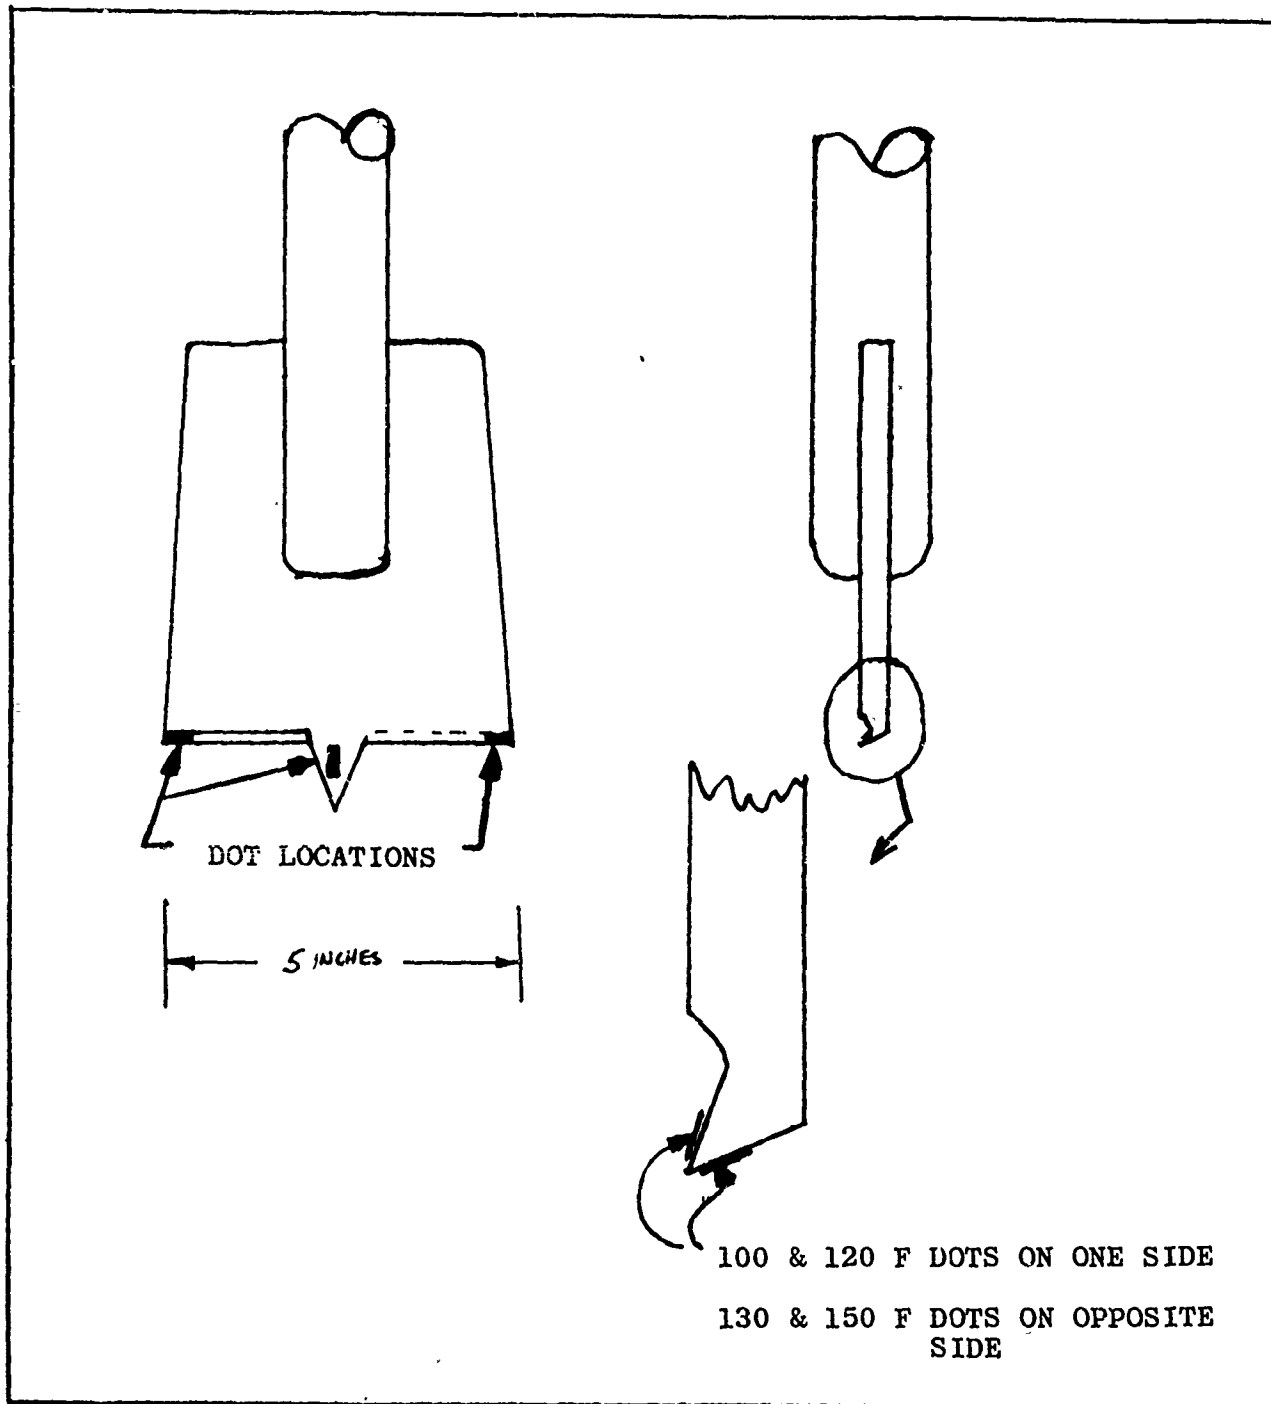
SKETCH OF SPADE DRILL BLADE USED TO MACHINE C-4 PROPELLANT FROM MOTOR FD-0014 SHOWING LOCATION OF THE TELETEMP INDICATOR DOTS.
